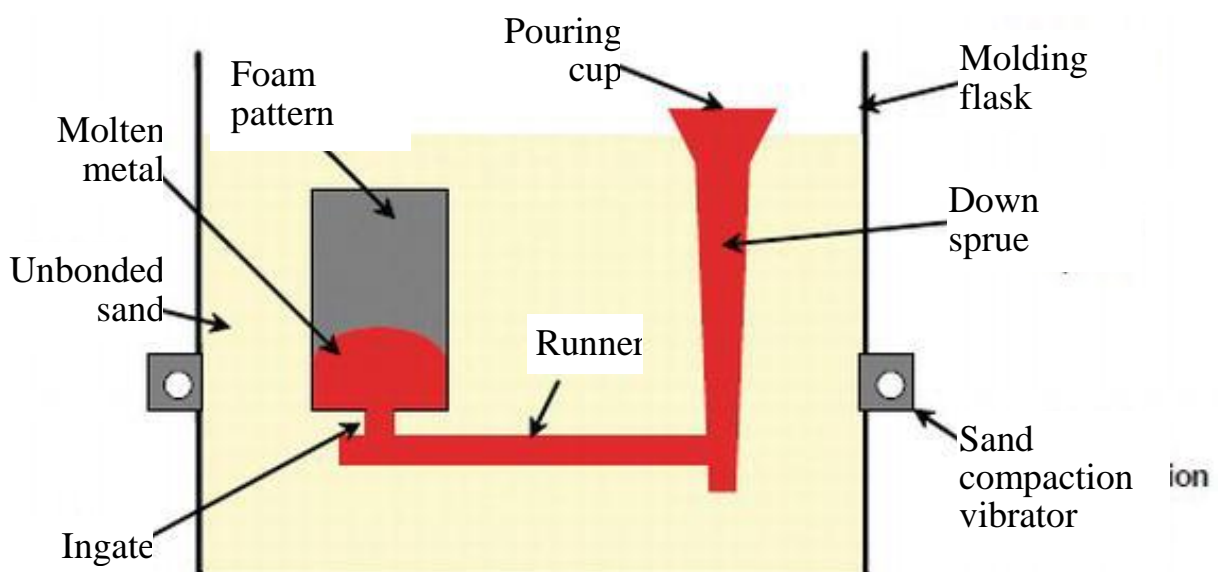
Schematic of molten metal pouring in evaporative pattern casting process
